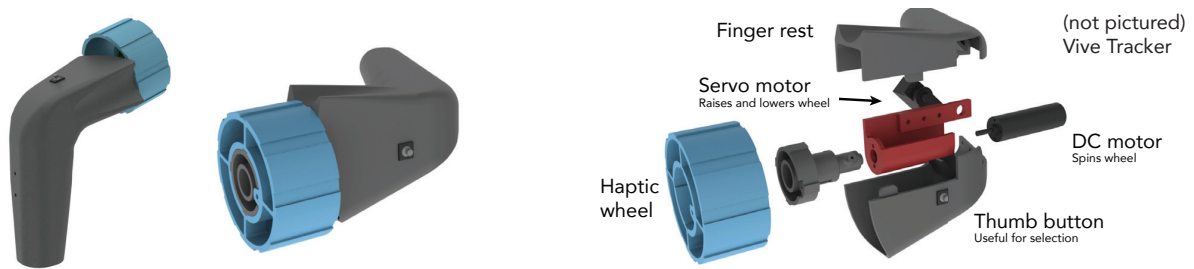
(left) 3D model of Haptic Revolver with a textured wheel attached. (right) Exploded view showing internal components. A servo motor raises and lowers the wheel, while a DC motor spins the wheel to render motion and shear forces. A button on the side allows the user to select objects and navigate. The VIVE tracker (not shown) enables 6-DOF spatial tracking of our device
